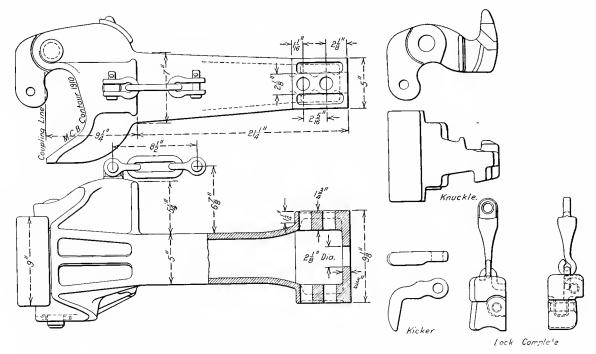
Type Z Top Operated Freight Coupler. Gould Coupler Company.
